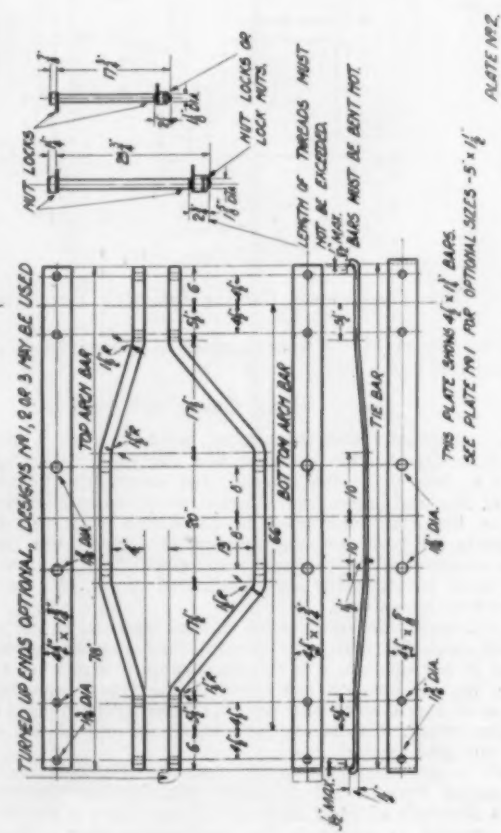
Plate 2, 4 1/2 in. by 1 1/2 in. Arch Bars for 40-Ton Trucks
